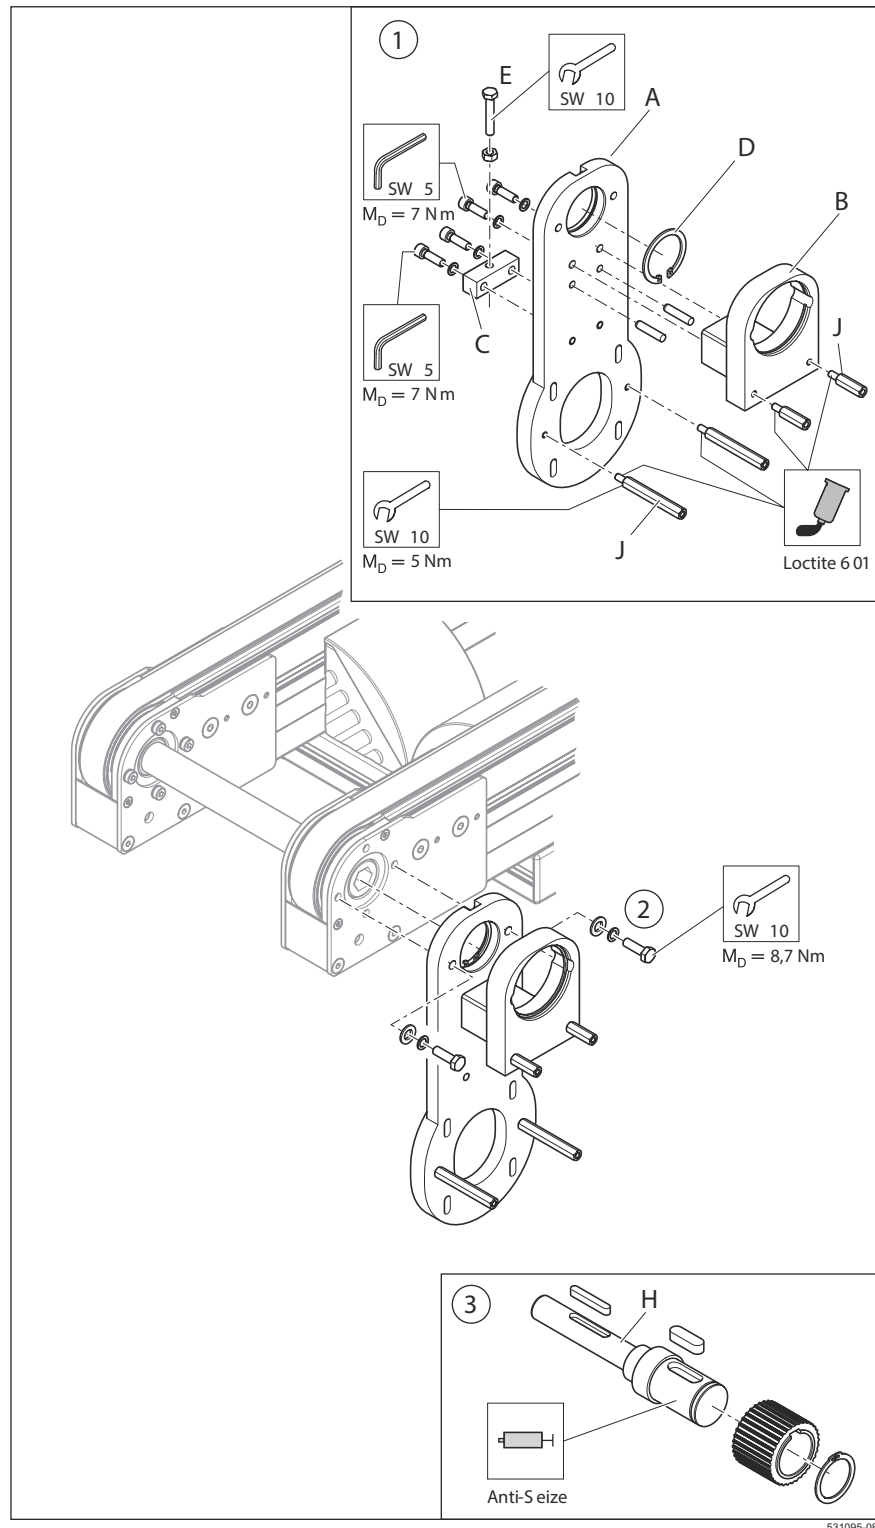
Assembly at belt section CSS/N, CSS/NT: MS = 1, MA = L (1/2)
